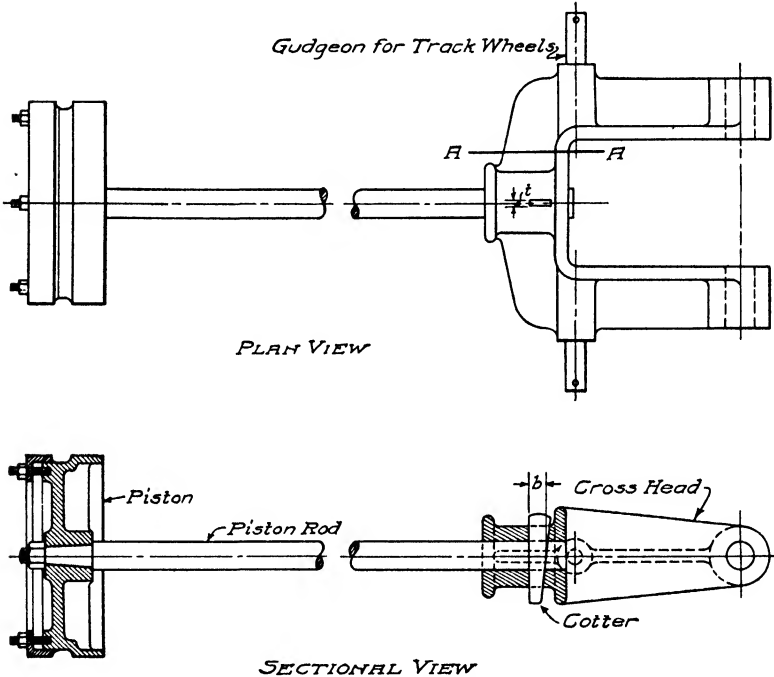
Details of Pull-Machine Piston, Rod, and Crosshead
